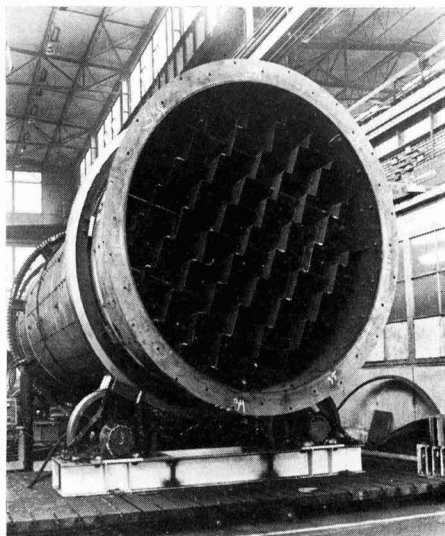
Beet pulp dryer under construction at ZUP Nysa
